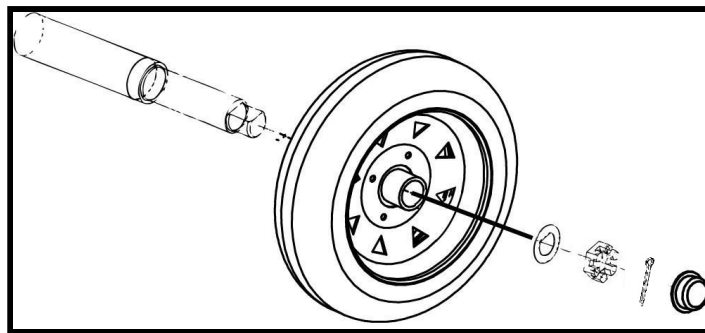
The wheel assembly illustrating the axle, wheel assembly, washer, castle nut, cotter pin, and dust cap.
